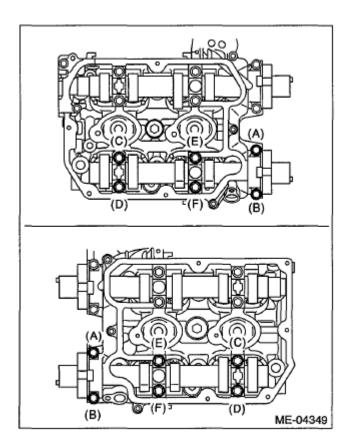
Identifying Front Camshaft Cap And Exhaust Camshaft Cap Bolts Courtesy of SUBARU OF AMERICA, INC.
